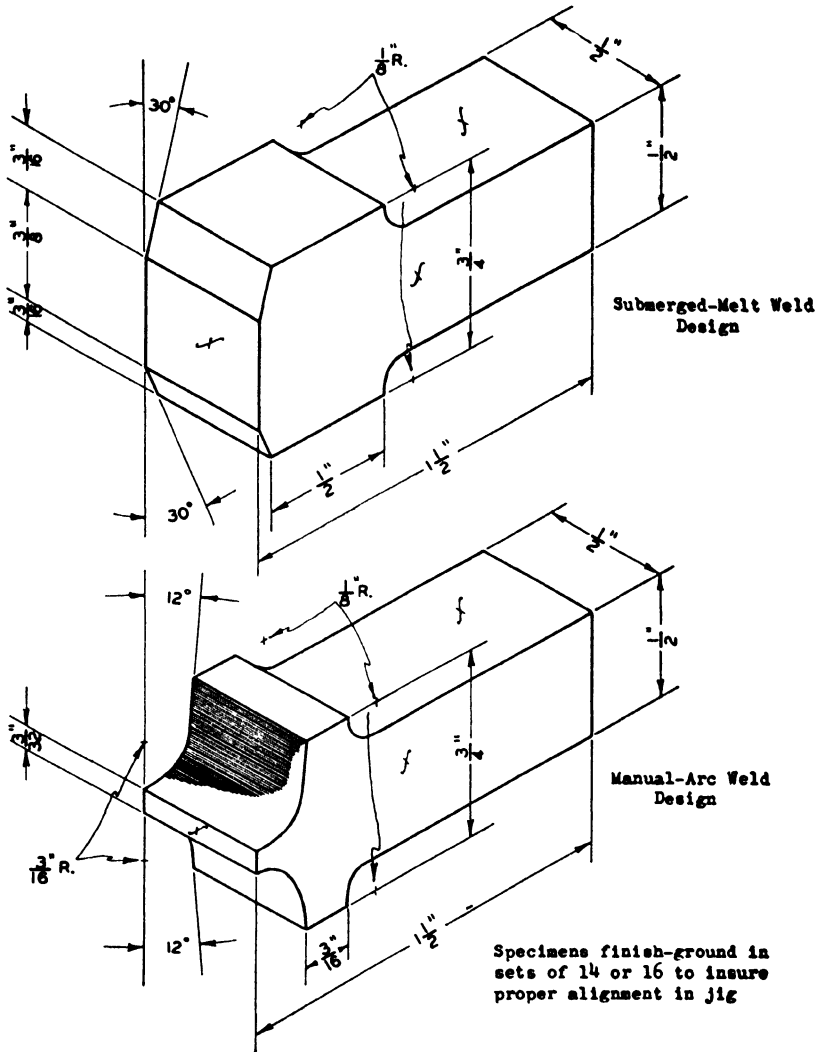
Bucket base replica for wheel and bucket design weld test. (After Lin-nert)
